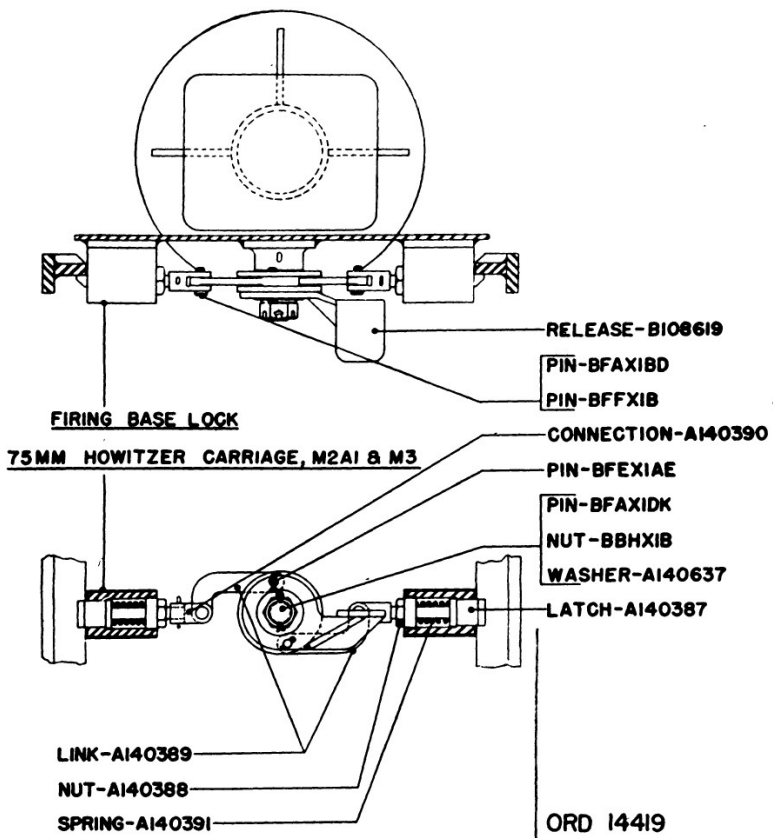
75-mm howitzer carriage, M2A1 and M3—firing base lock.
